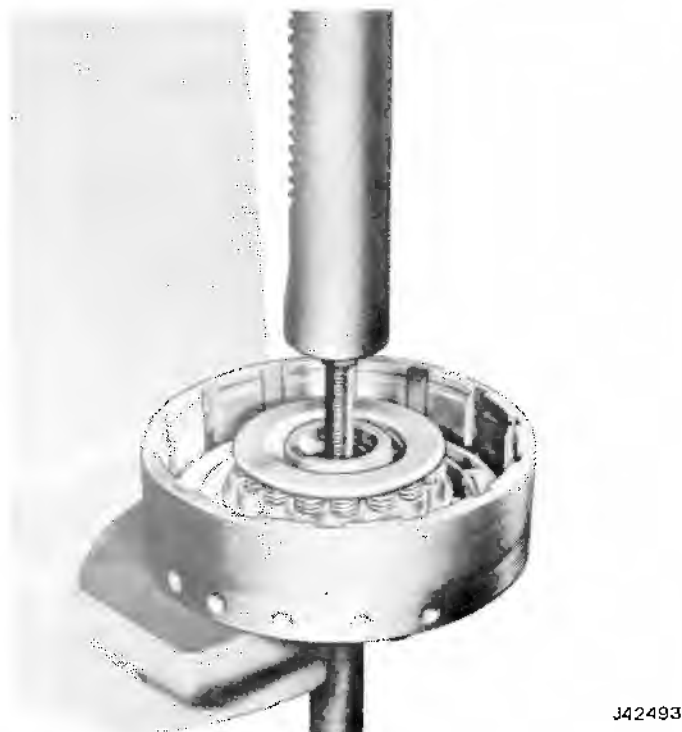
Pressing Turbine Shaft from Forward Clutch Housing
